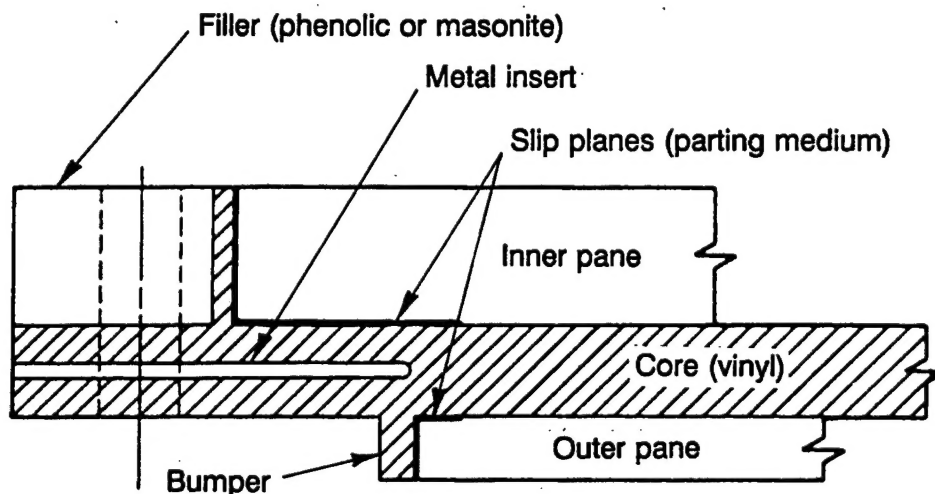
C/KC-135 and B-52 W/WS General Construction
